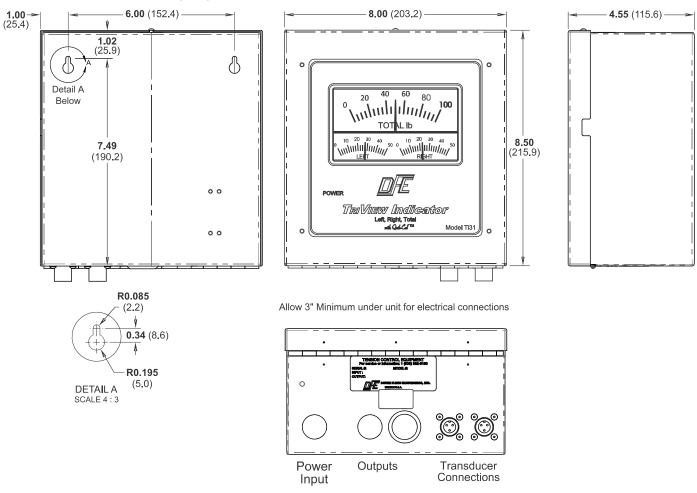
DIMENSIONS OF ENCLOSURE VERSION
